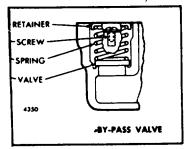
By-Pass Valve Assembly Secured by Retainer and Screw
